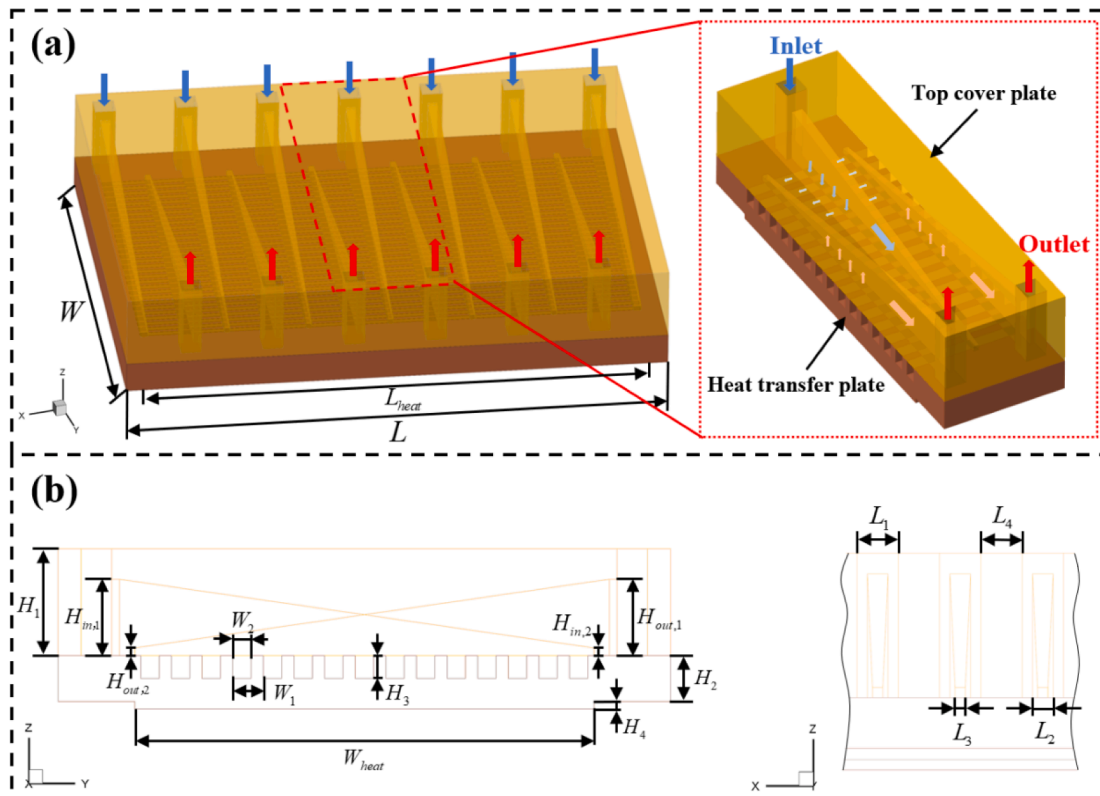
(a) Hybrid slot jet impingement/microchannel heat sink 3-D model; (b) Detailed dimensions of each part.
